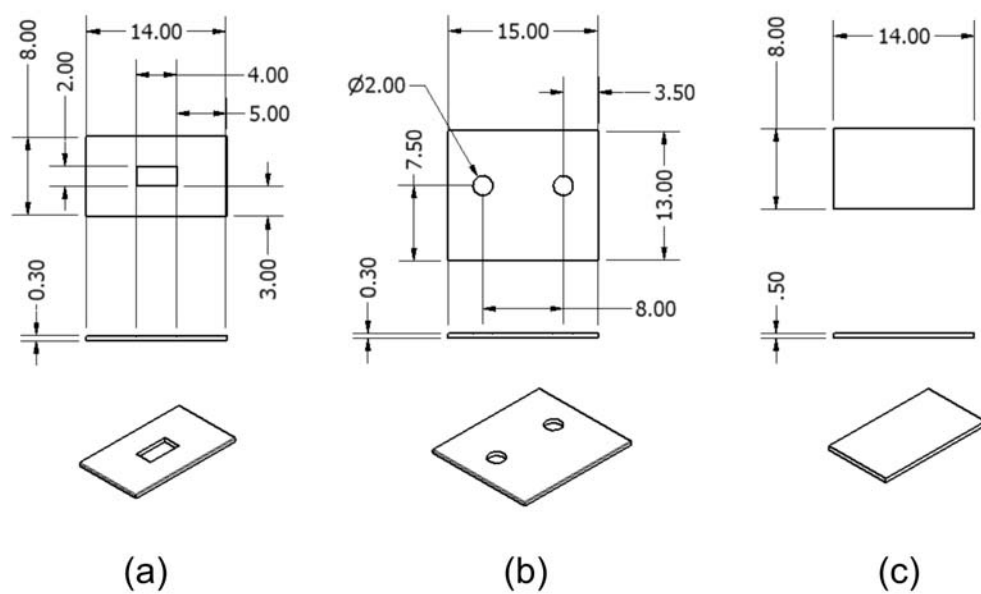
Engineering drawings with dimensions for (a) the PDMS top gasket, (b) the PDMS bottom gasket, and (c) the pyrex window.
